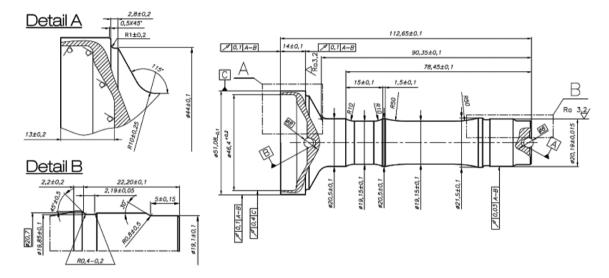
Technical drawing of a sample detail subjected under inspection
